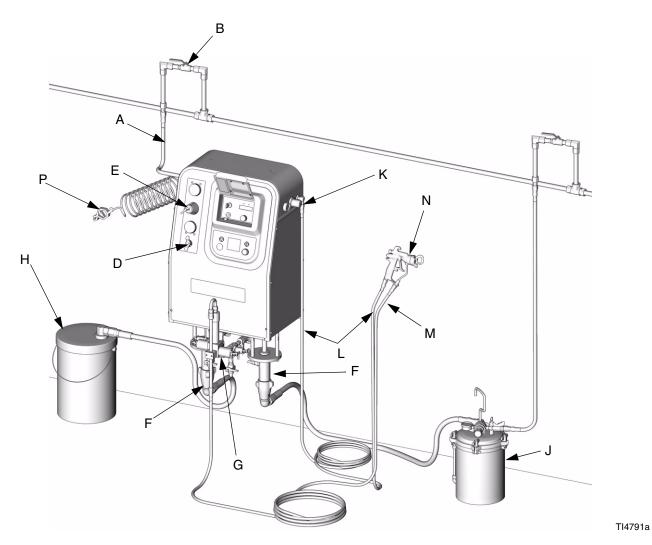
Typical Installation, shown in a wall mounted, air-assisted proportioning system
